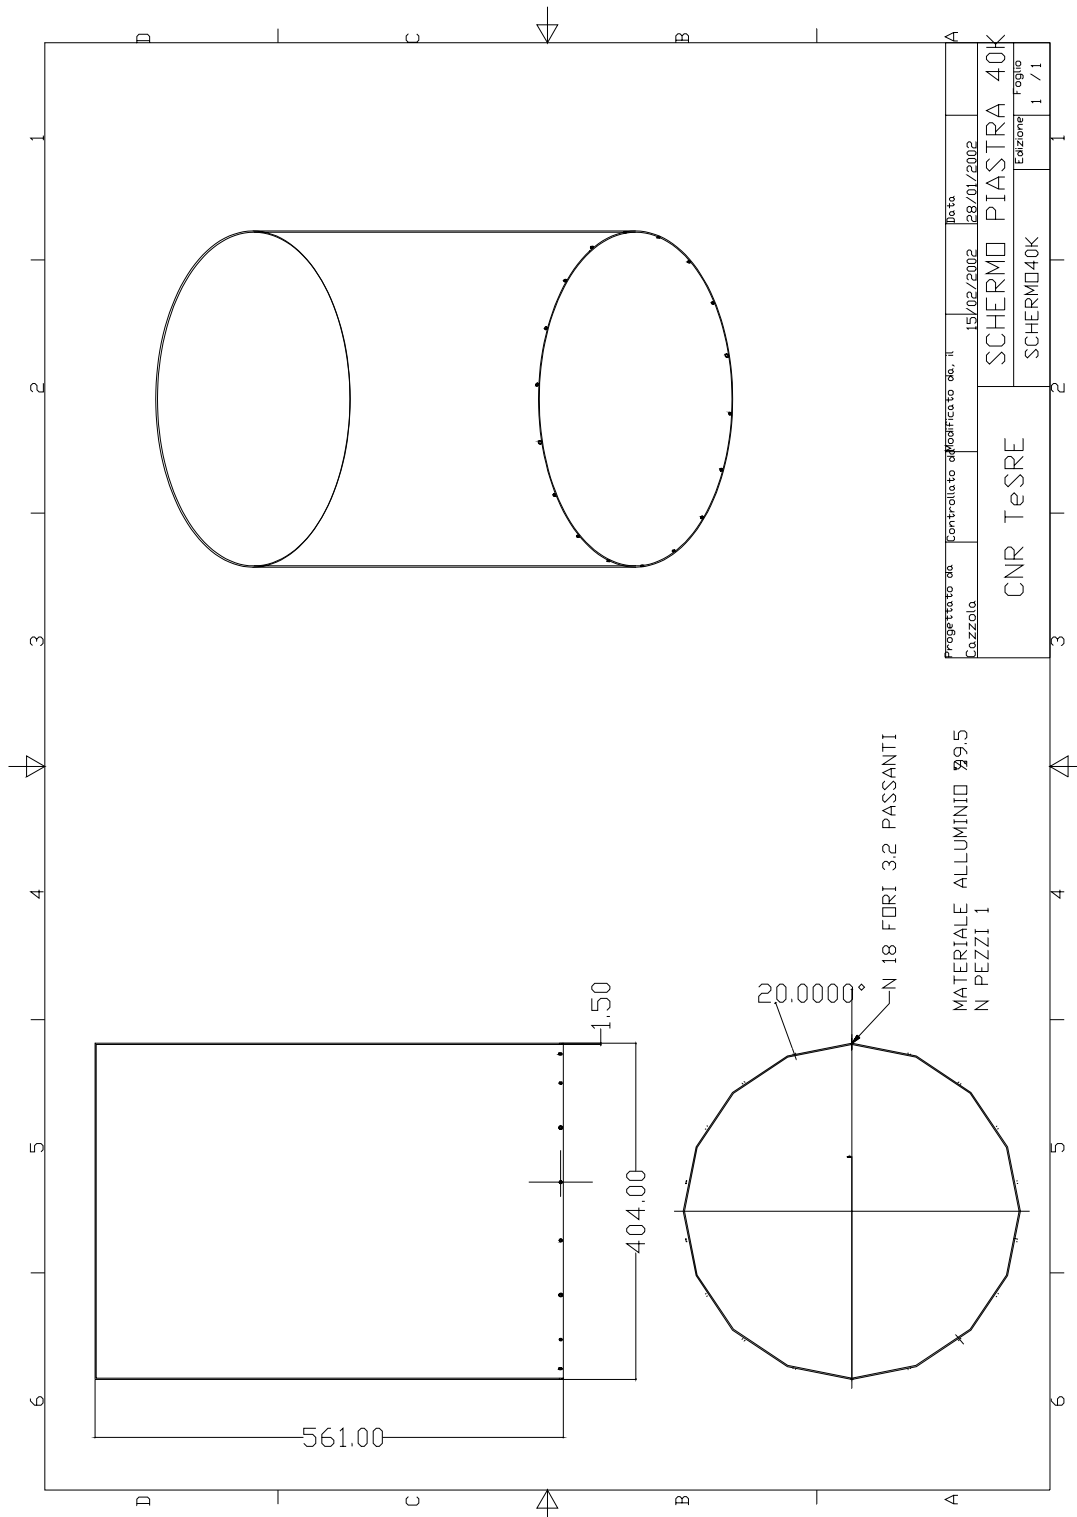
Drawing of the 40K radiation shield, made of aluminum 99.5%
